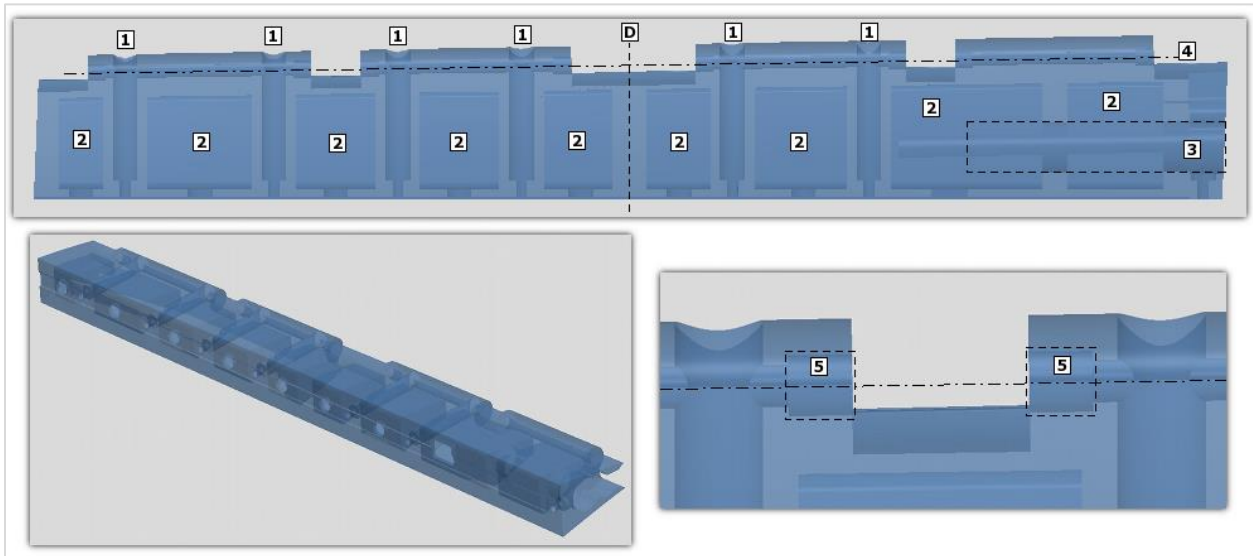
Module base design: {D} Dividing line between the two 1-foot pieces of the base. {1} Access tubes to reach socket cap screws which attach the base to the blade. {2} Empty cavities which reduce weight. {3} Motor location. {4} Hinge center line. {5} Pockets which hold the sleeve bearings.
